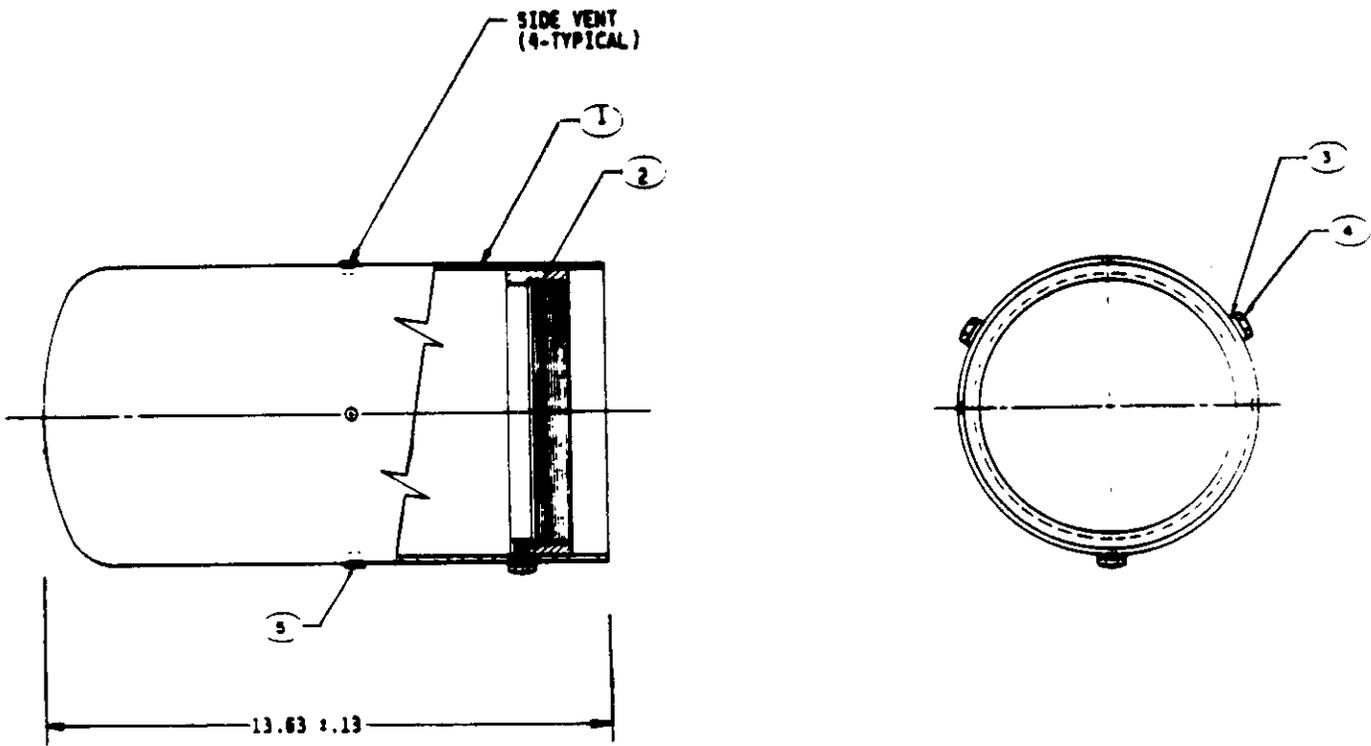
Cap. Shipping. Halon 1301 Cylinder Assembly
